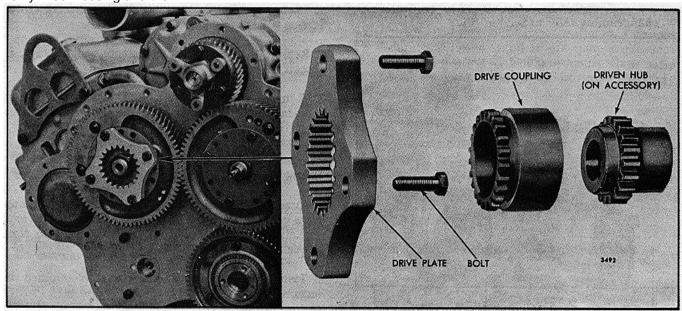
Components of Accessory Drive for Direct-Driven Accessories
